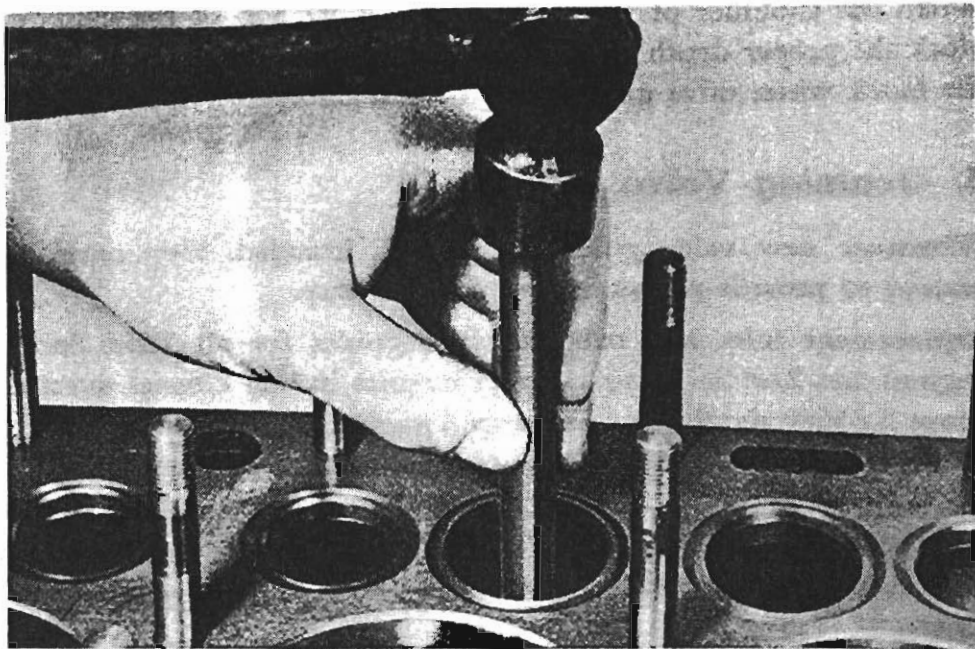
Drive the Valve Guide Downward with Valve Guide Remover J-2580 as Shown.
